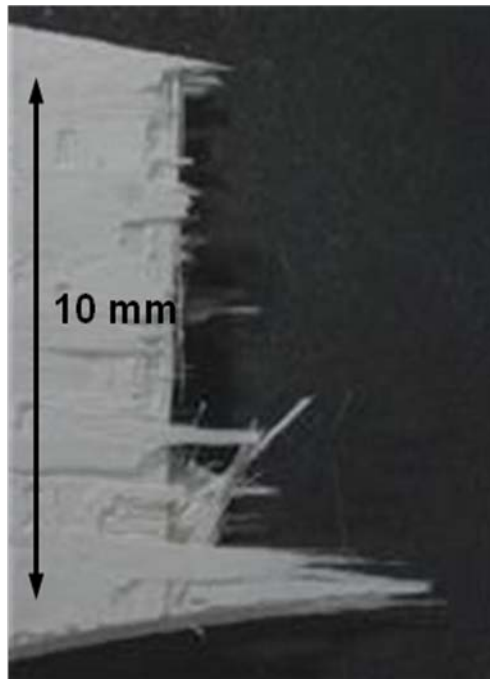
Fracture surface of the N720/AM specimen tested in tension to failure at 900°C in laboratory air.
